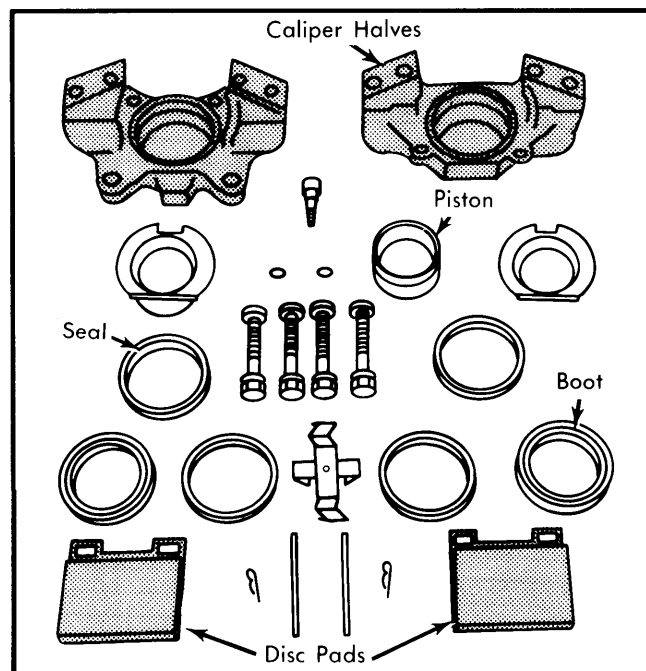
Disassembled View of Typical Mercedes-Benz Brake Caliper
